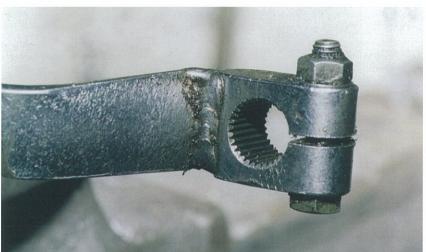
The splined split boss from the donor motorcycle, showing it welded to the gearchange pedal. (Steve Williams)
